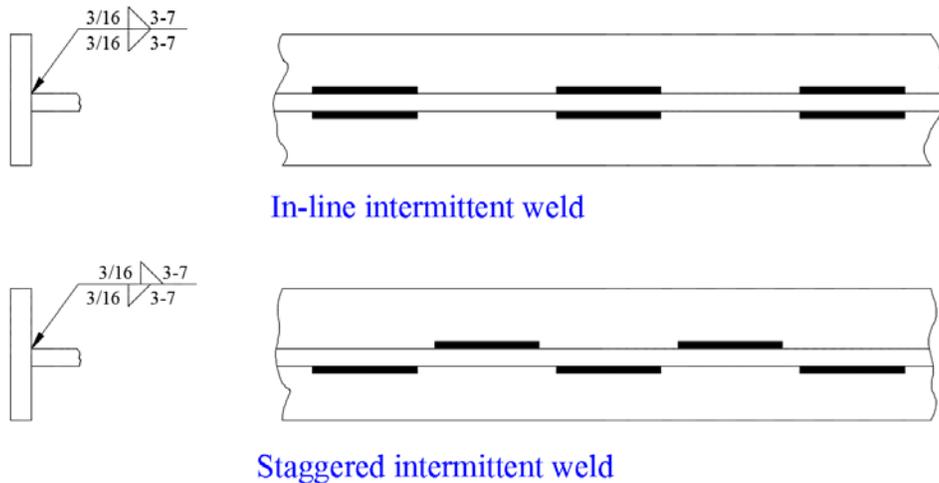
Welding symbols for in-line and staggered intermittent fillet welds
